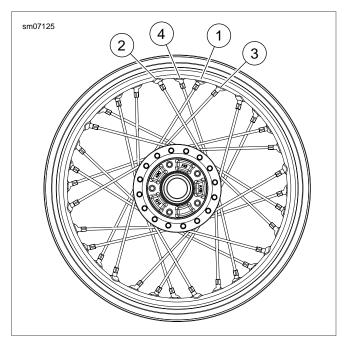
32-Spoke Single Row Straight Flange Hub
